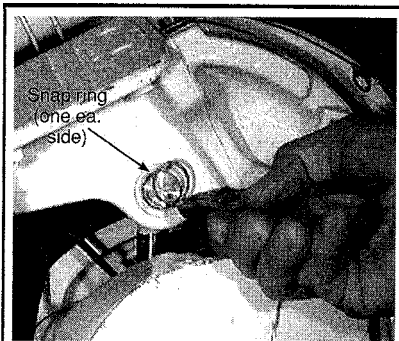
Remove the 2 snaprings--one each side--from the tilt piston pin...
